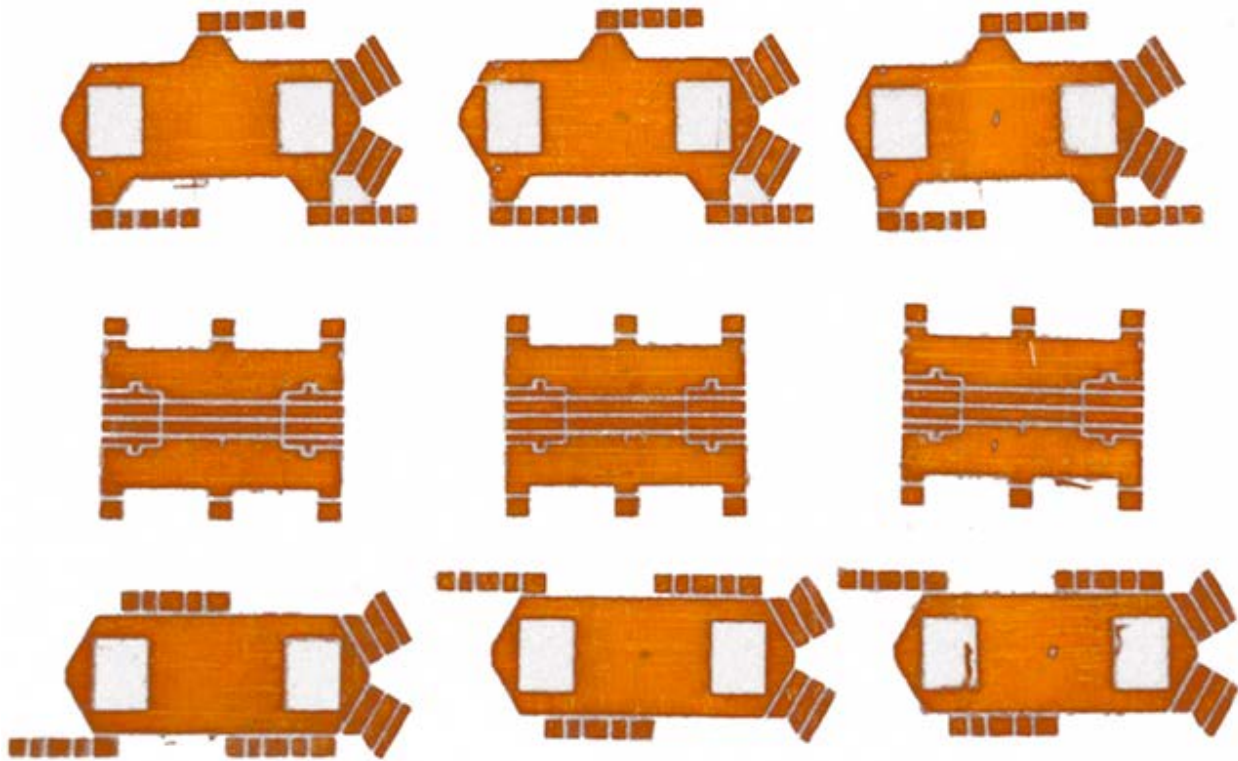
A palette of flat SCM parts showing 3 complete RoACH thoraxes ready for folding and assembly
